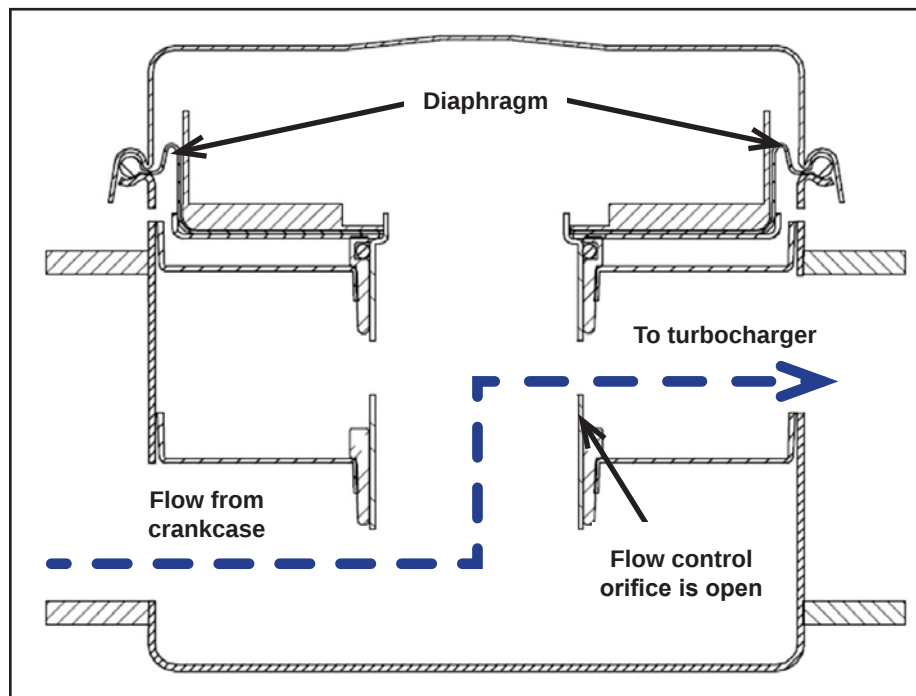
Cutaway of crankcase pressure regulating valve under low loads
